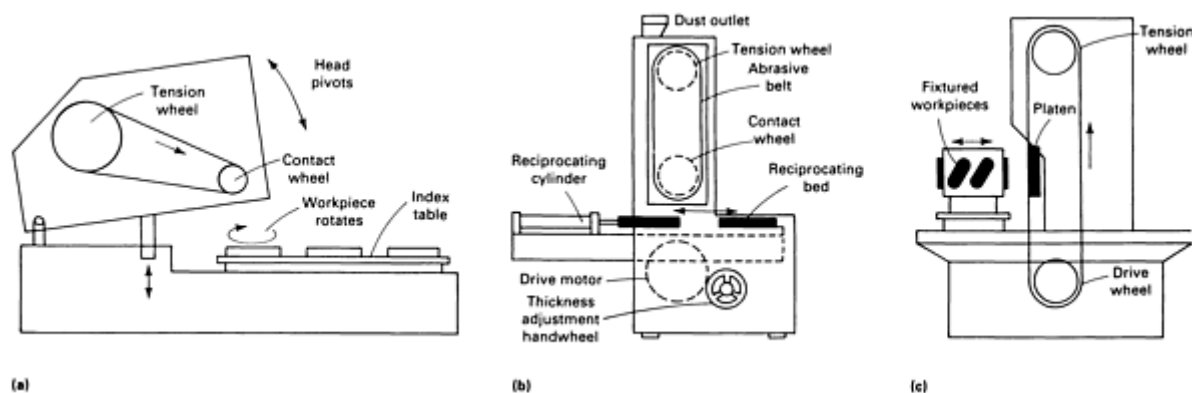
Schematics illustrating the primary components of coated abrasive precision grinding machines. (a)
